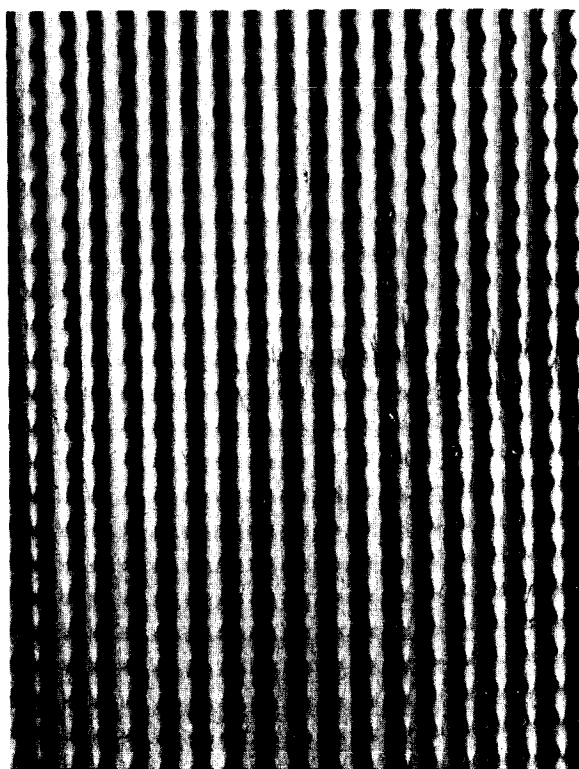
Close-up view of apertures formed in convectively cooled chamber by crimping coolant tubes.
